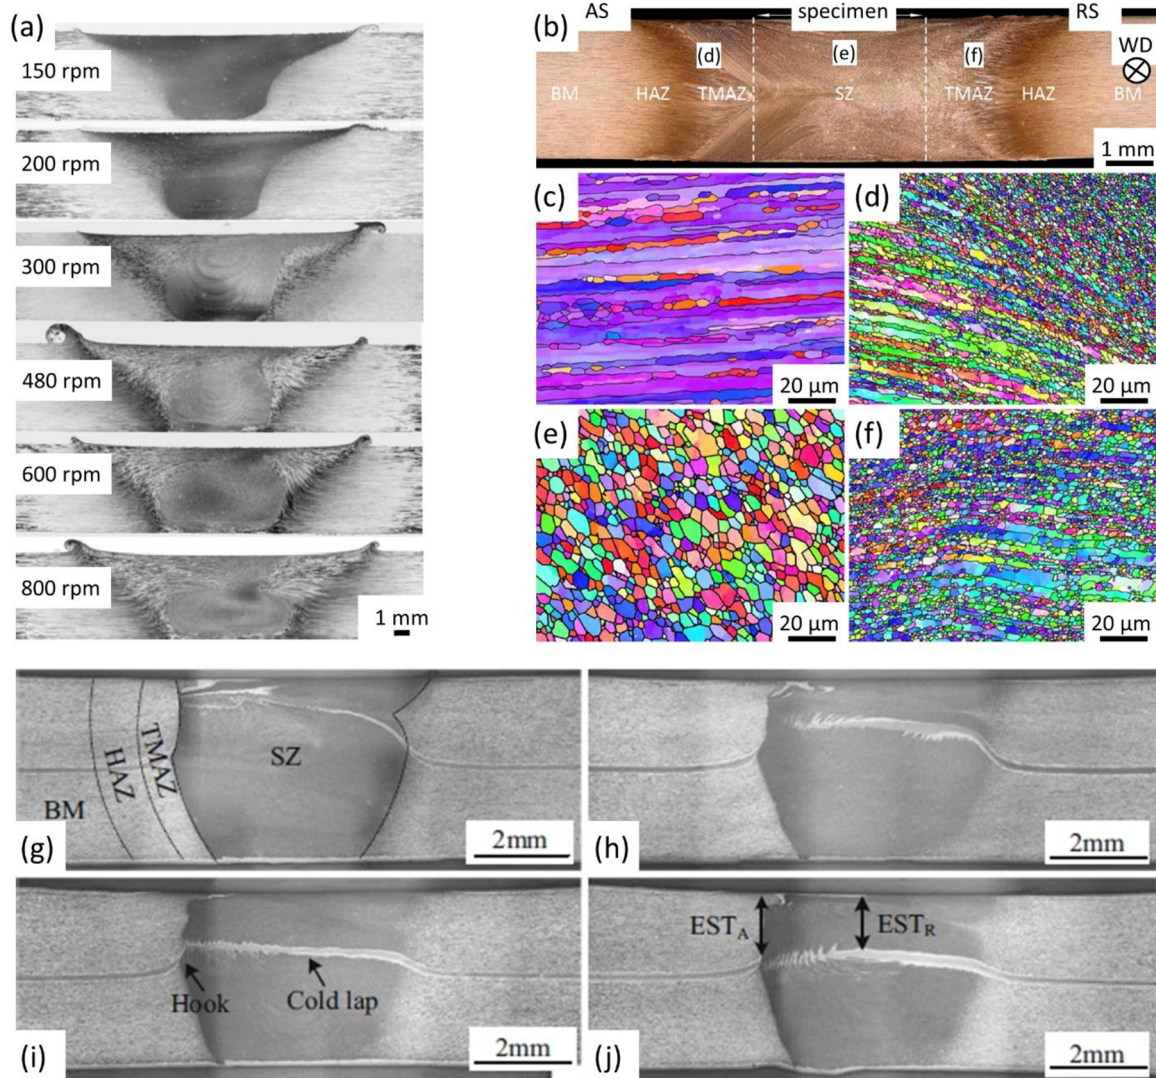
(a) Macrosections of the welds produced by conventional FSW using various rotational speeds (rpm = rotation per minute) (at constant welding speed and vertical force) illustrating the shape of the weld nugget formed according to Yan et al. [108]. Reprinted with permission from Taylor & Francis. (b) A macrograph showing a typical weld nugget (X-type) formed in a BT-FSW process; and EBSD micrographs illustrating the grain morphologies of (c) the BM, (d) the TMAZ on the advancing side (AS), (e) the SZ, and (f) the TMAZ on the retreating side (RS) according to Wang et al. [109]. Reprinted with permission from Elsevier. Cross-section of the stationary-shoulder friction-stir-lap-welded joint using different welding speeds: (g) 40 mm/min, (h) 70 mm/min, (i) 100 mm/min, and (j) 130 mm/min according to Xu et al. [114]. Reprinted with permission from Springer Nature.
